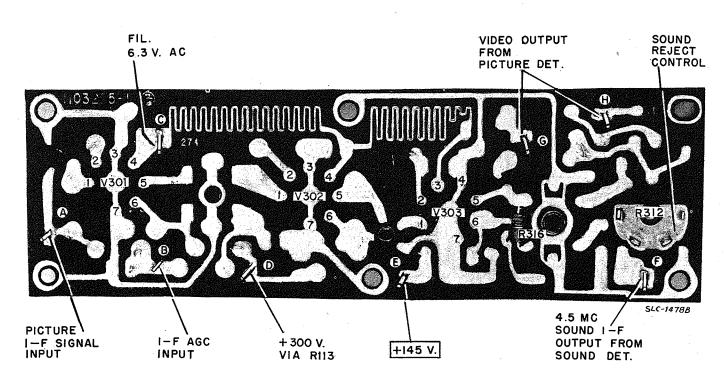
Bottom View, Printed Circuit Board PW-300—1st, 2nd, 3rd Picture I-F-CTC5, CTC5N.
